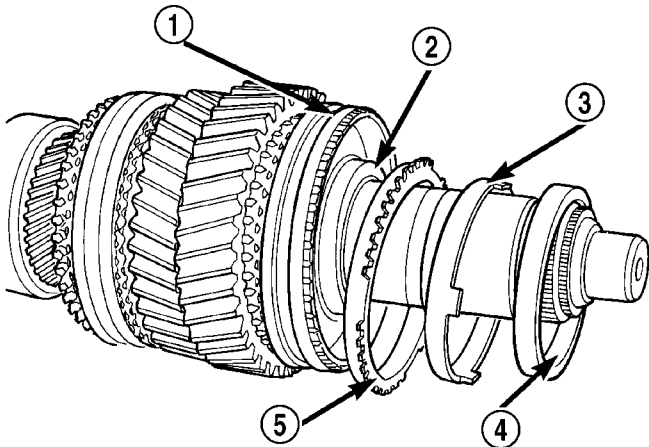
SECOND GEAR AND NEEDLE BEARING
